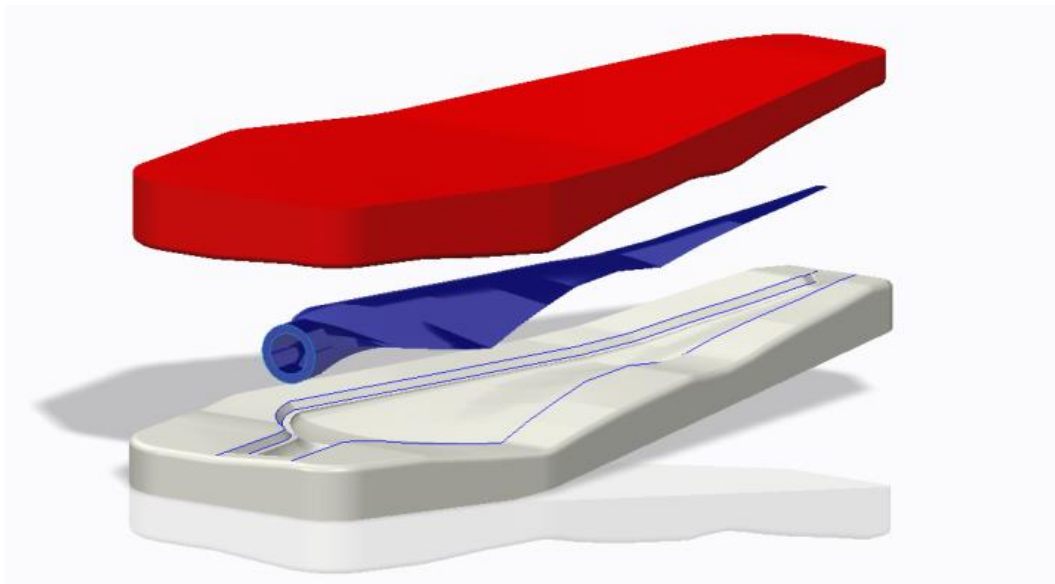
Final mold design; Exploded view displaying bottom and top mold
